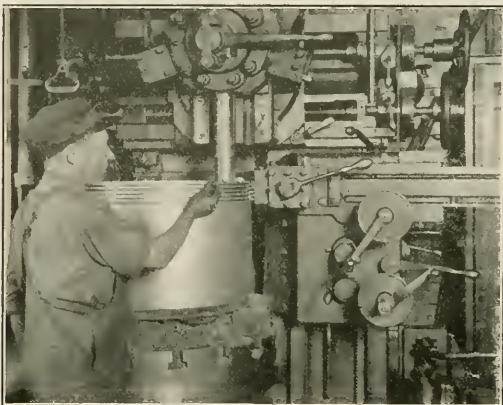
Manufacturing Cylinder Packing On a Vertical Turret Lathe
